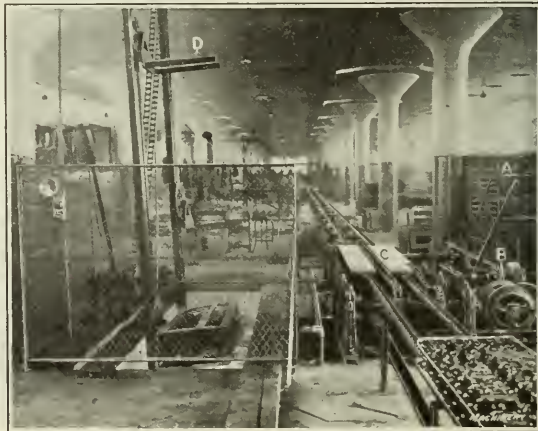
Conveyor System for Third Floor, and Elevator to Shipping Room
